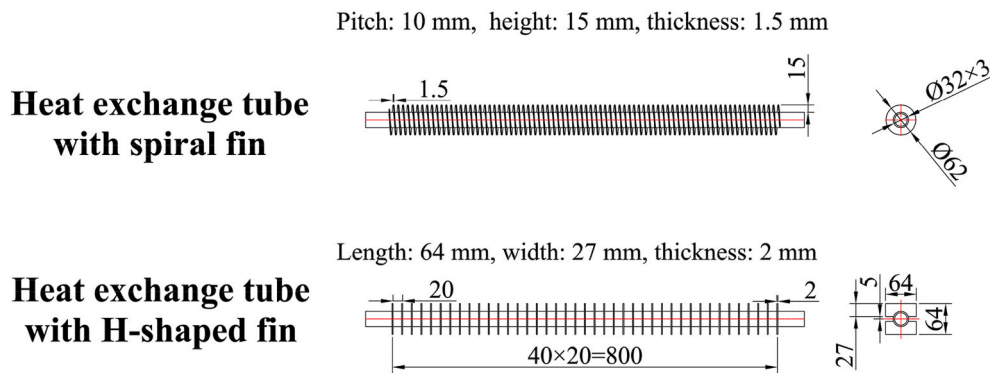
Details regarding the dimensions of the heat exchange tubes with spiral and H-shaped fins (unit: mm).
